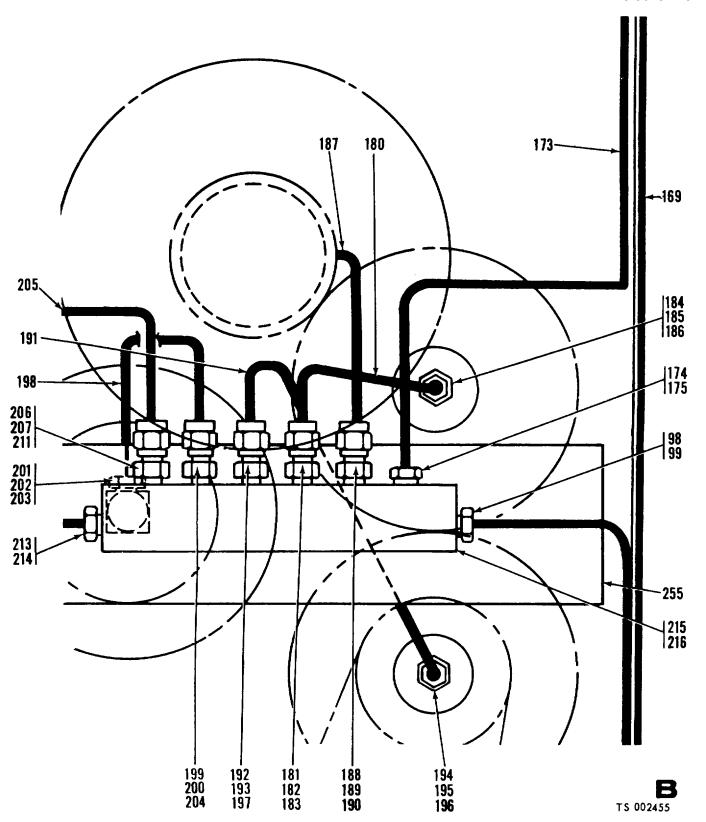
Offset unit oil line assembly. (Sheet 4 of 5 ) 4-28
